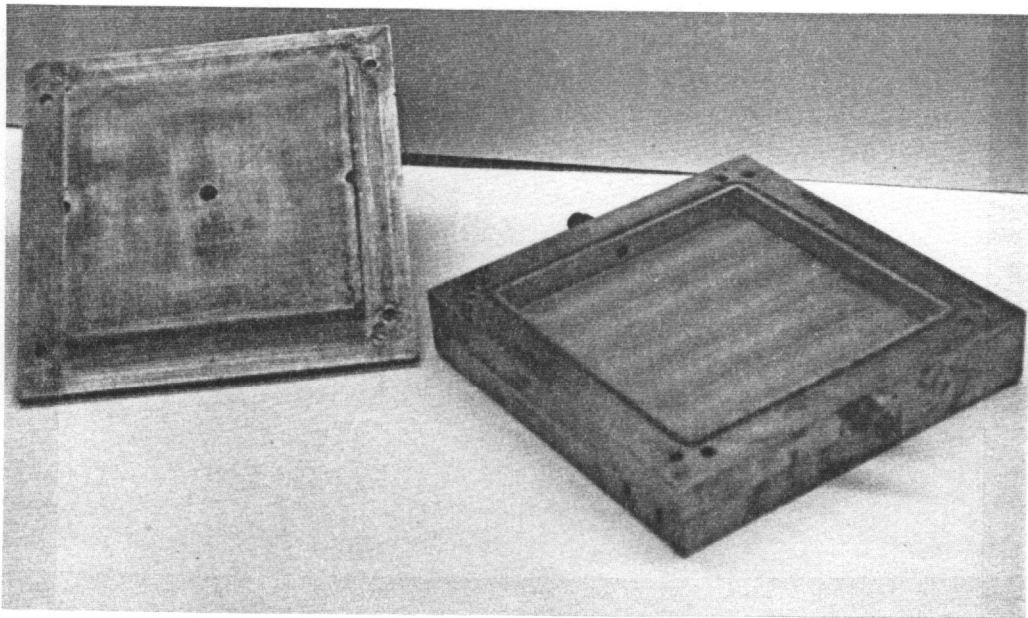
Photograph of the aluminum mold used to manufacture composites by liquid molding.
